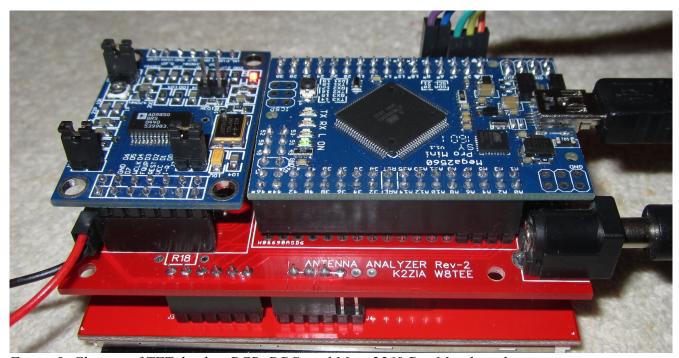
Closeup of TFT display, PCB, DDS, and Mega2560 Pro Mini boards.
